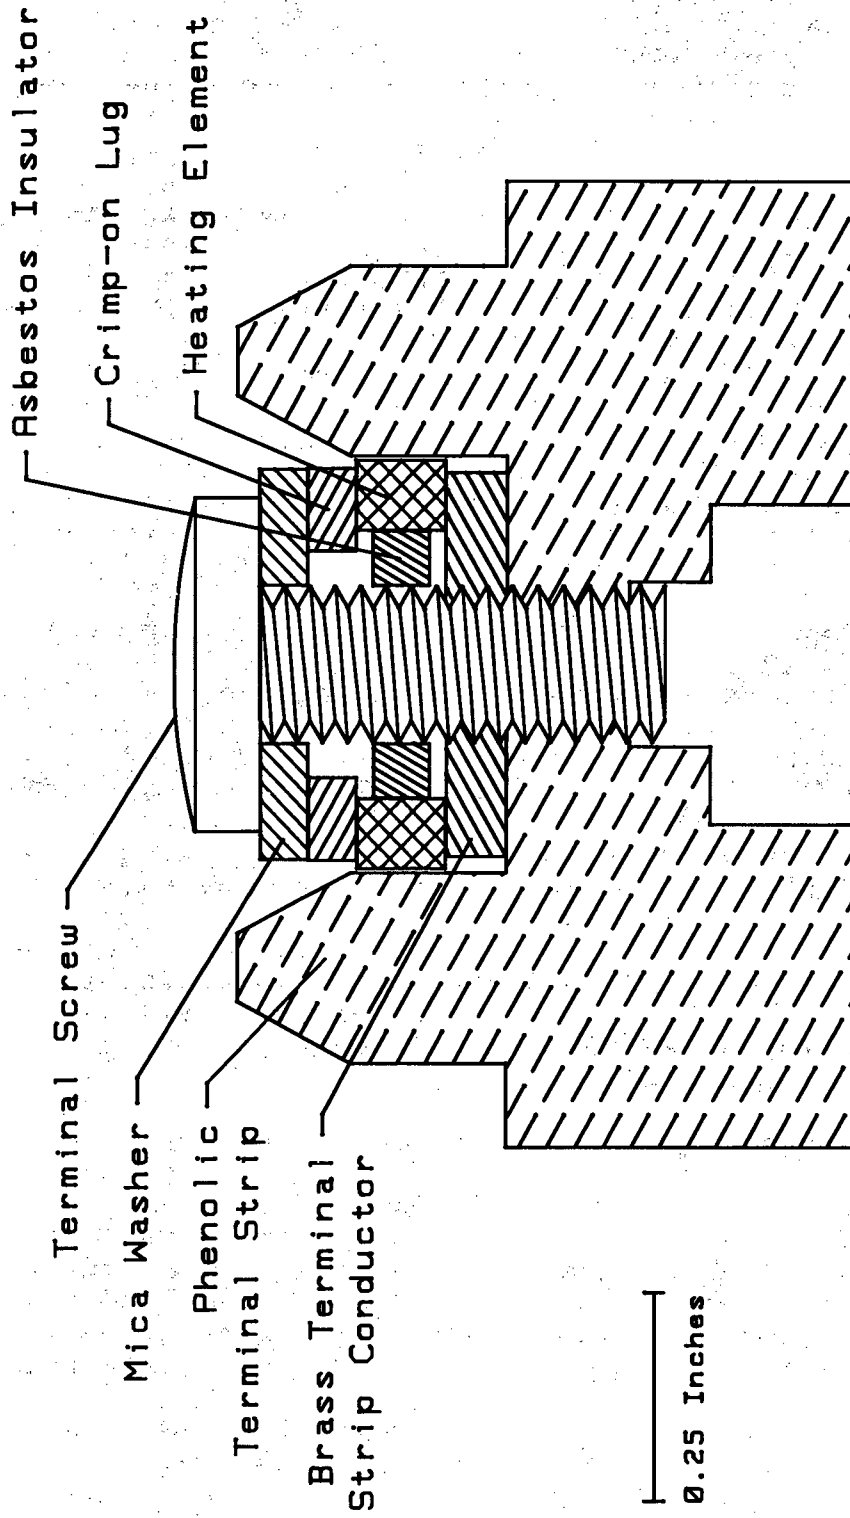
Cross-Sectional View of Typical Electrically Initiated Fire Apparatus
